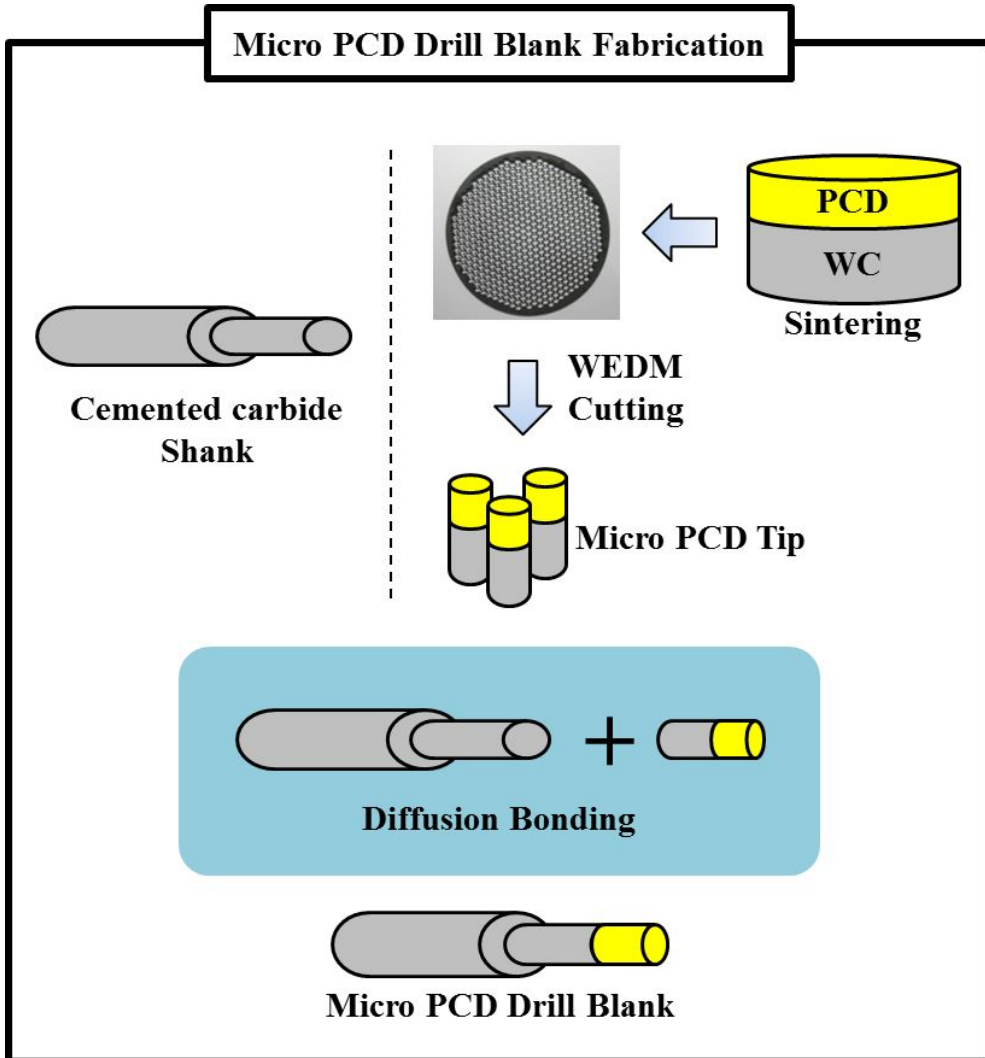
Fabricated process of diffusion bonding for micro PCD drill blank
